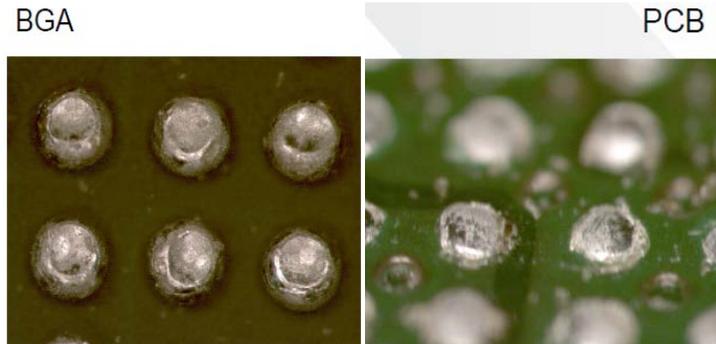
HiP defect after BGA rip off. Right side is the bottom side of the BGA showing the concavity.
